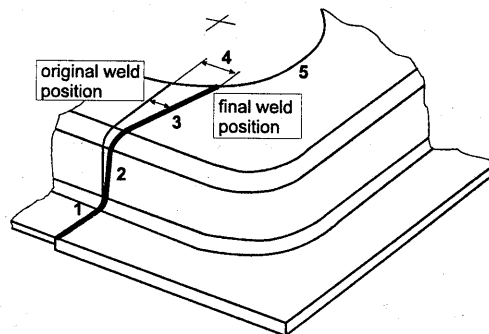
Definition of the weld displacement measure points for the stretching product (points 1' to 4' are mirrored on the other side)
